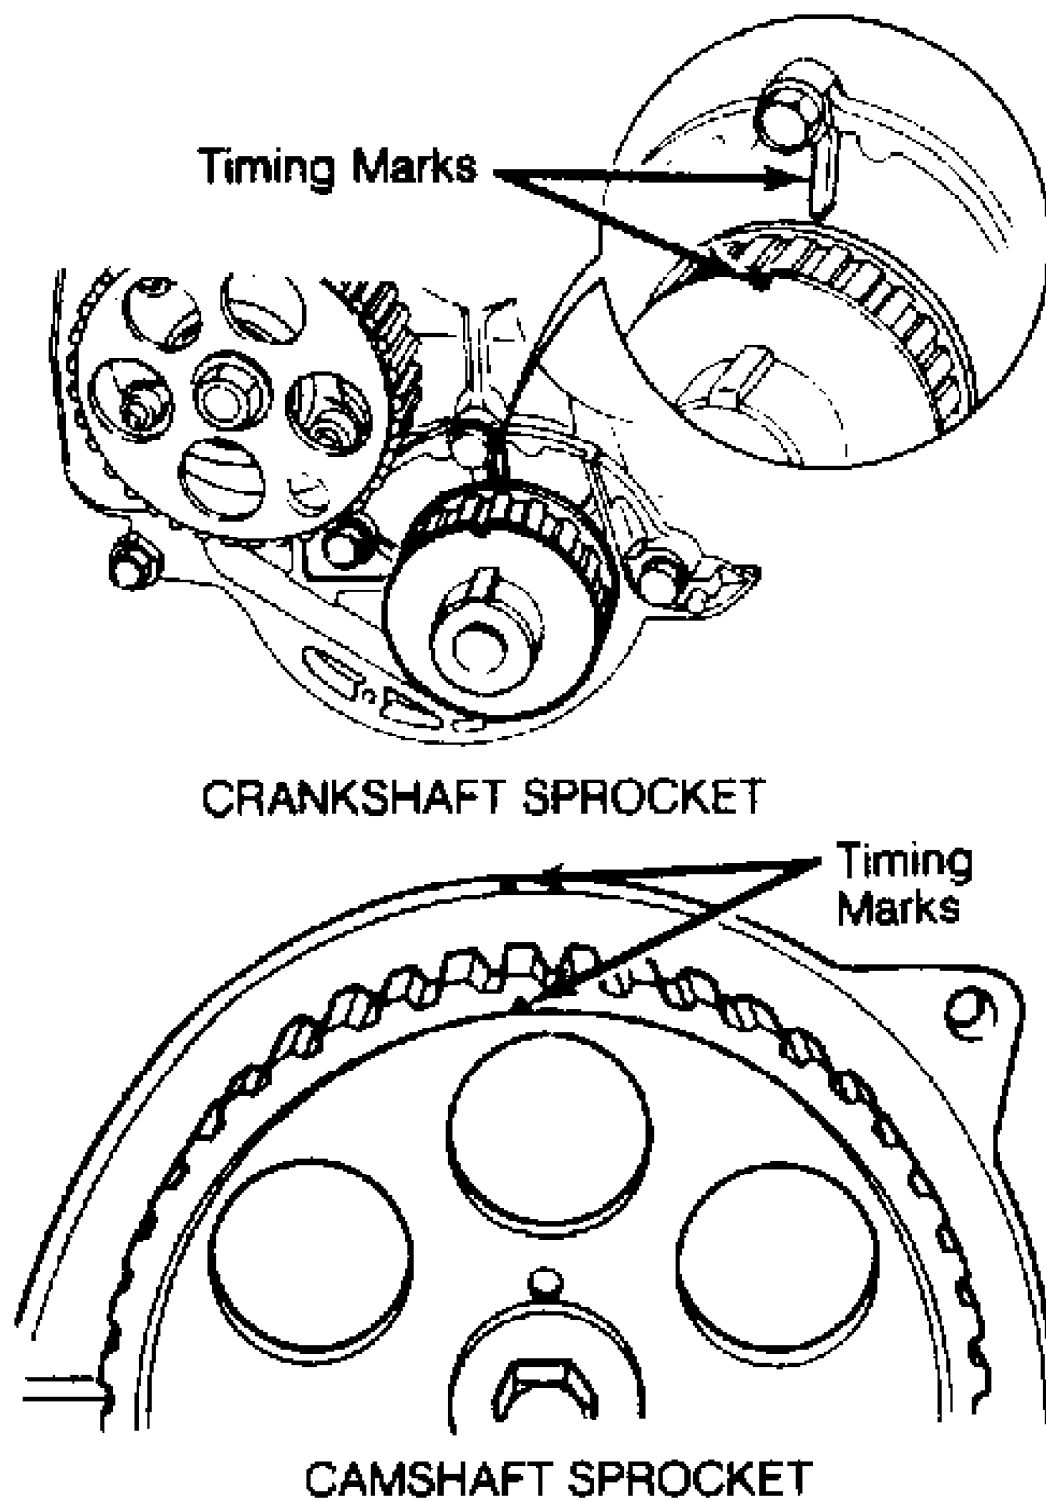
Aligning Timing Belt Sprockets on 2.0L & 2.3L Models
